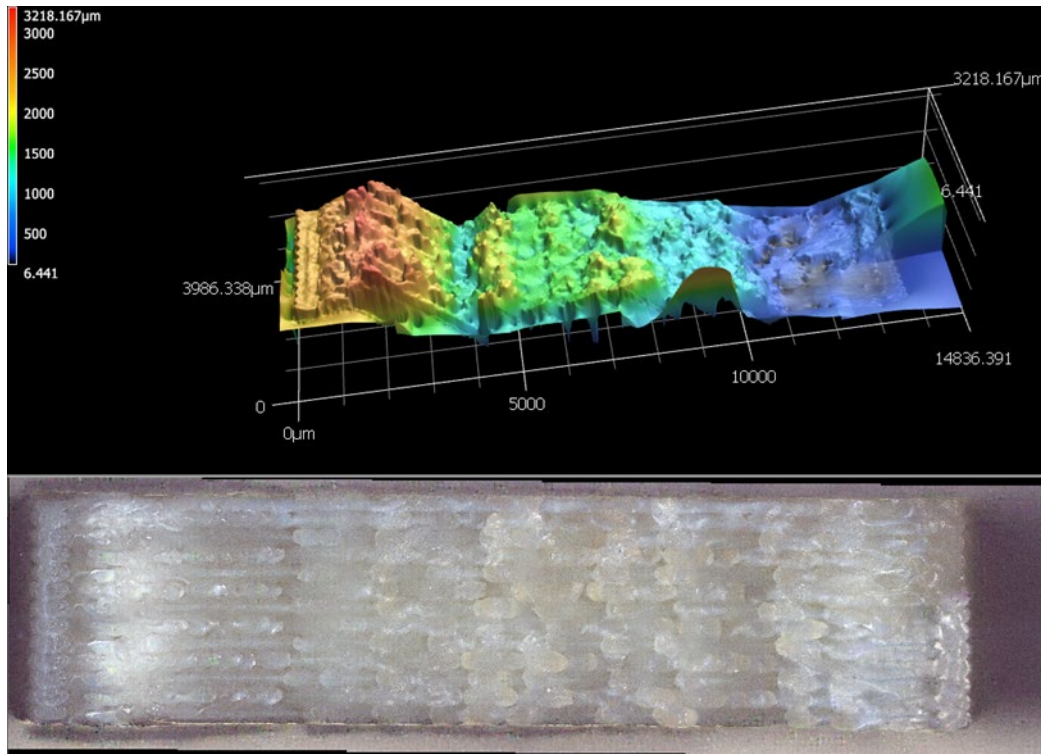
Fracture surface of an XY built specimen, tested for tension properties
